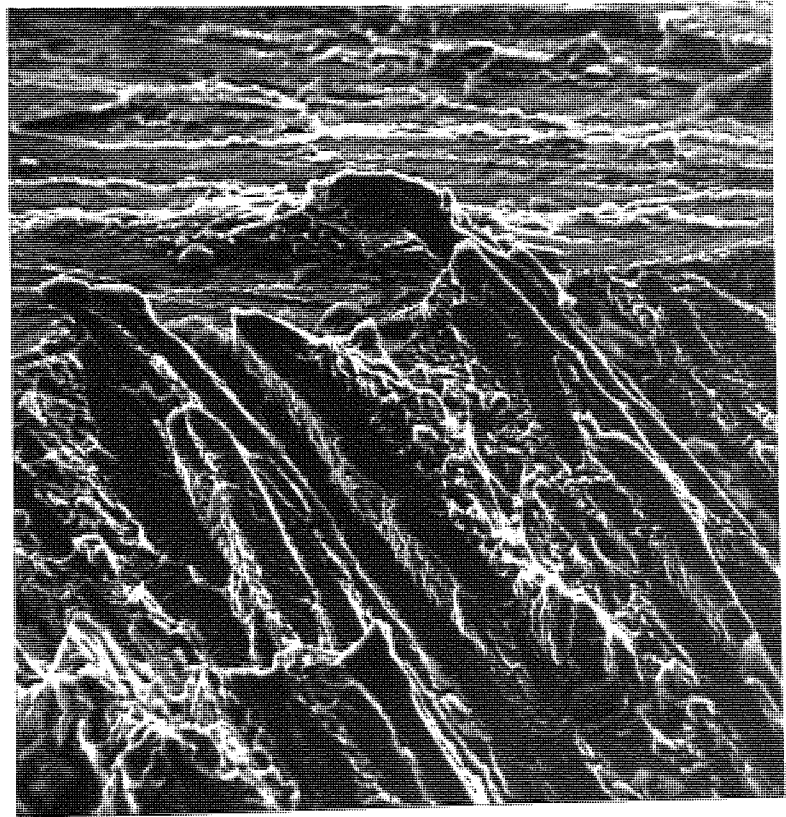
(a) FRACTURE SURFACE FROM SPECIMEN COOLED FROM 1080°C TO 770°C, SOLUTION TREATED AND AGED IMI 700
